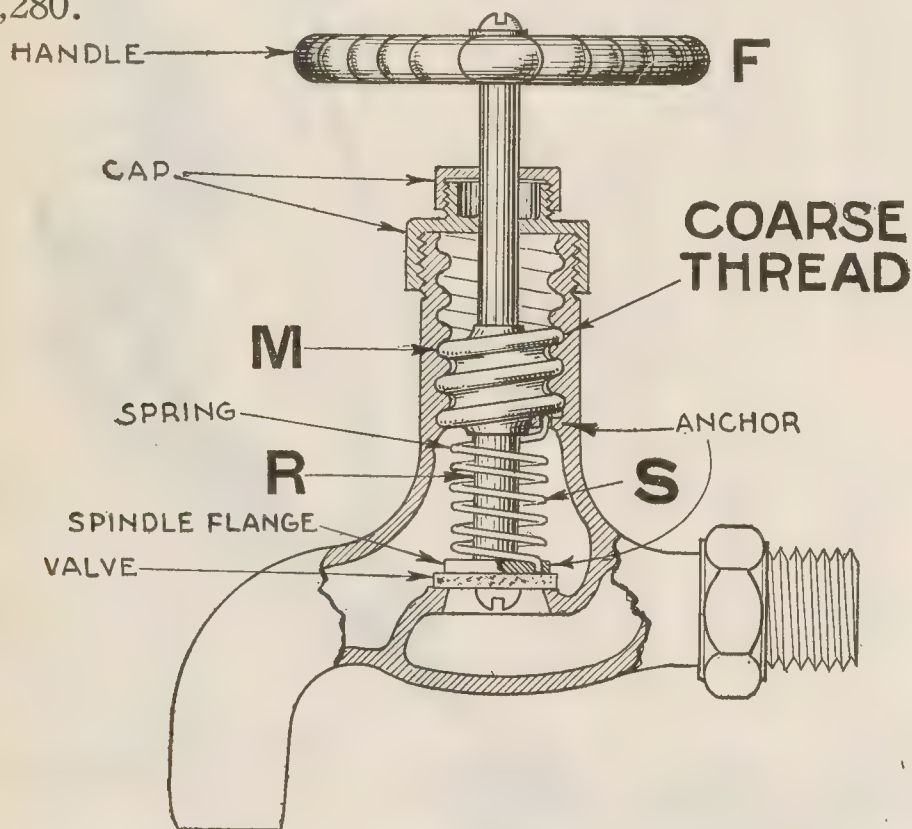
,279.—Self-closing compression faucet, coarse thread twisted spring type. *In operation*, when the spindle R, is turned counter-clockwise by means of the handle F, the coarse thread M, working in the threaded portion of the body lifts the spindle, thus opening the valve. This counter-clockwise turning of the spindle R, both compresses, and coils up the spring S, since it is anchored or fastened to the spindle flange at its lower end, and to the body of the faucet at its upper end. When the handle is released the spring uncoils, causing the spindle to turn clockwise and close the valve, in which position it is held against the pressure of the water by the compression of the spring.
